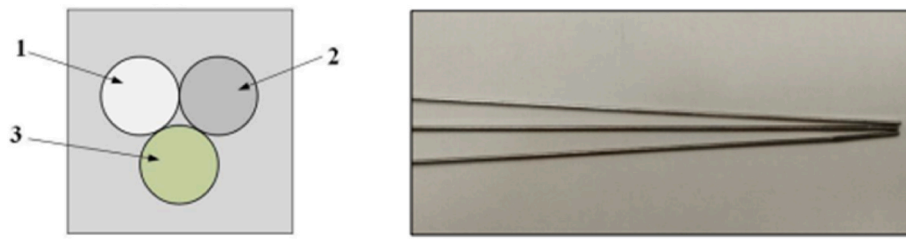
Bundle of welding rods [42]: 1 – Al rod (ALTIG AL99.7); 2 – Stainless steel rod (INTERROD 22-9-3), 3 – NiCr rod (NIROD 625).
